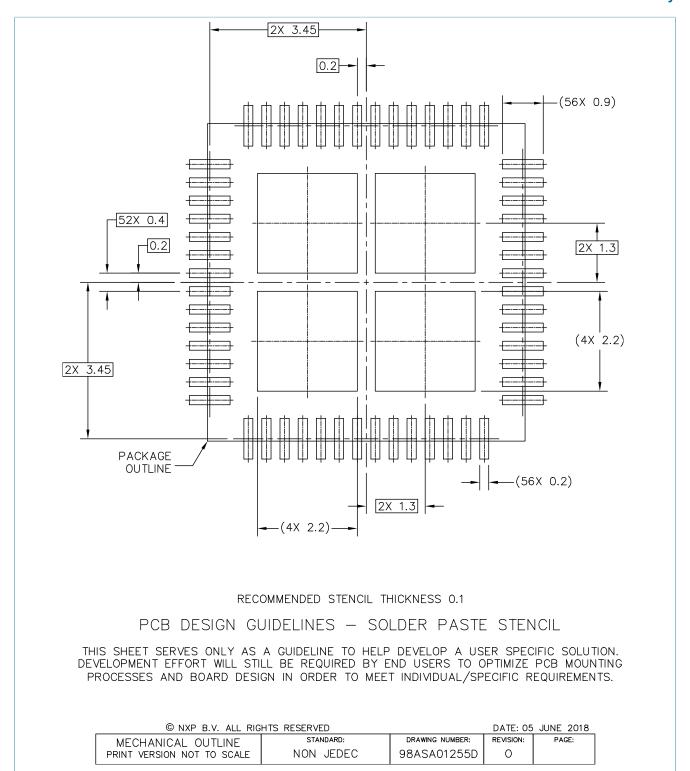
Reflow soldering footprint part3 for HVQFN56 (SOT949-5)
